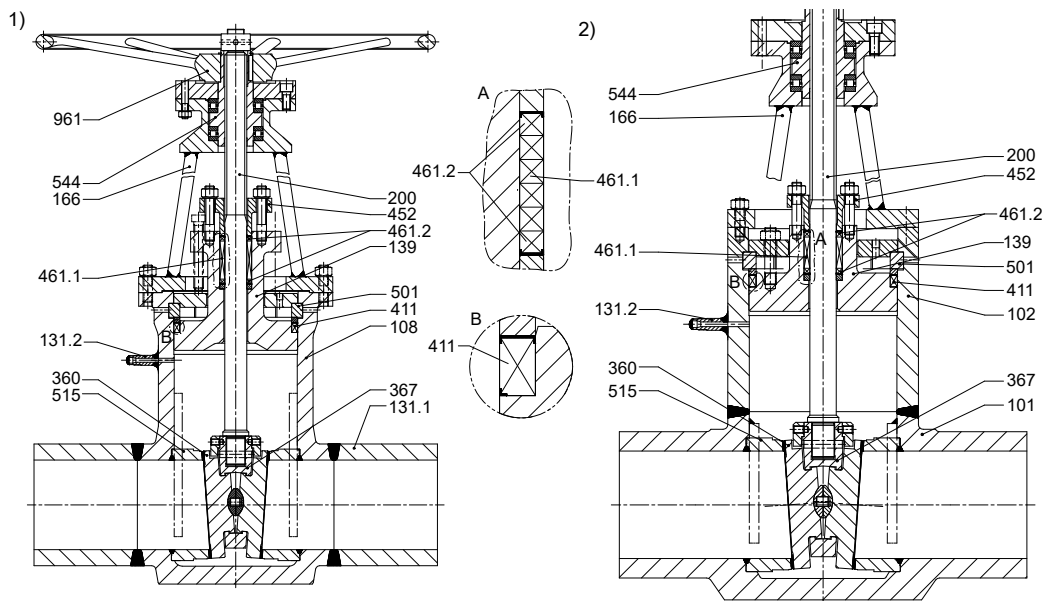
Sectional drawings; ZTS 1) With connection branch extensions 2) Without connection branch extensions
